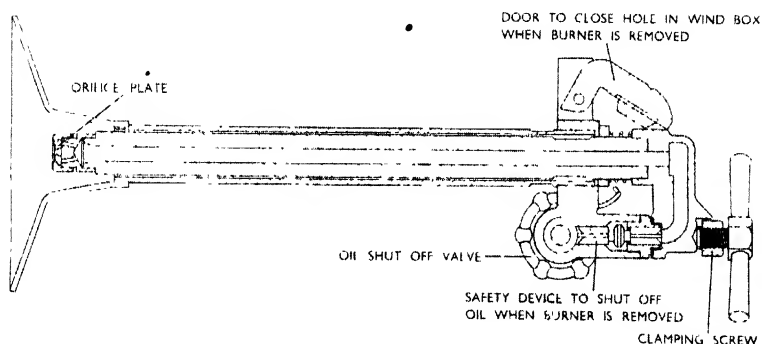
BABCOCK & WILCOX PATENT OIL BURNER
